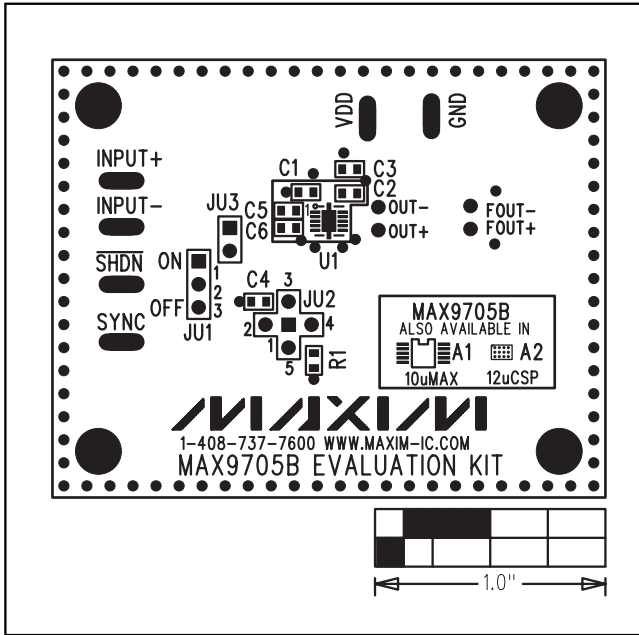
MAX9705B EV Kit Component Placement Guide—Component Side
